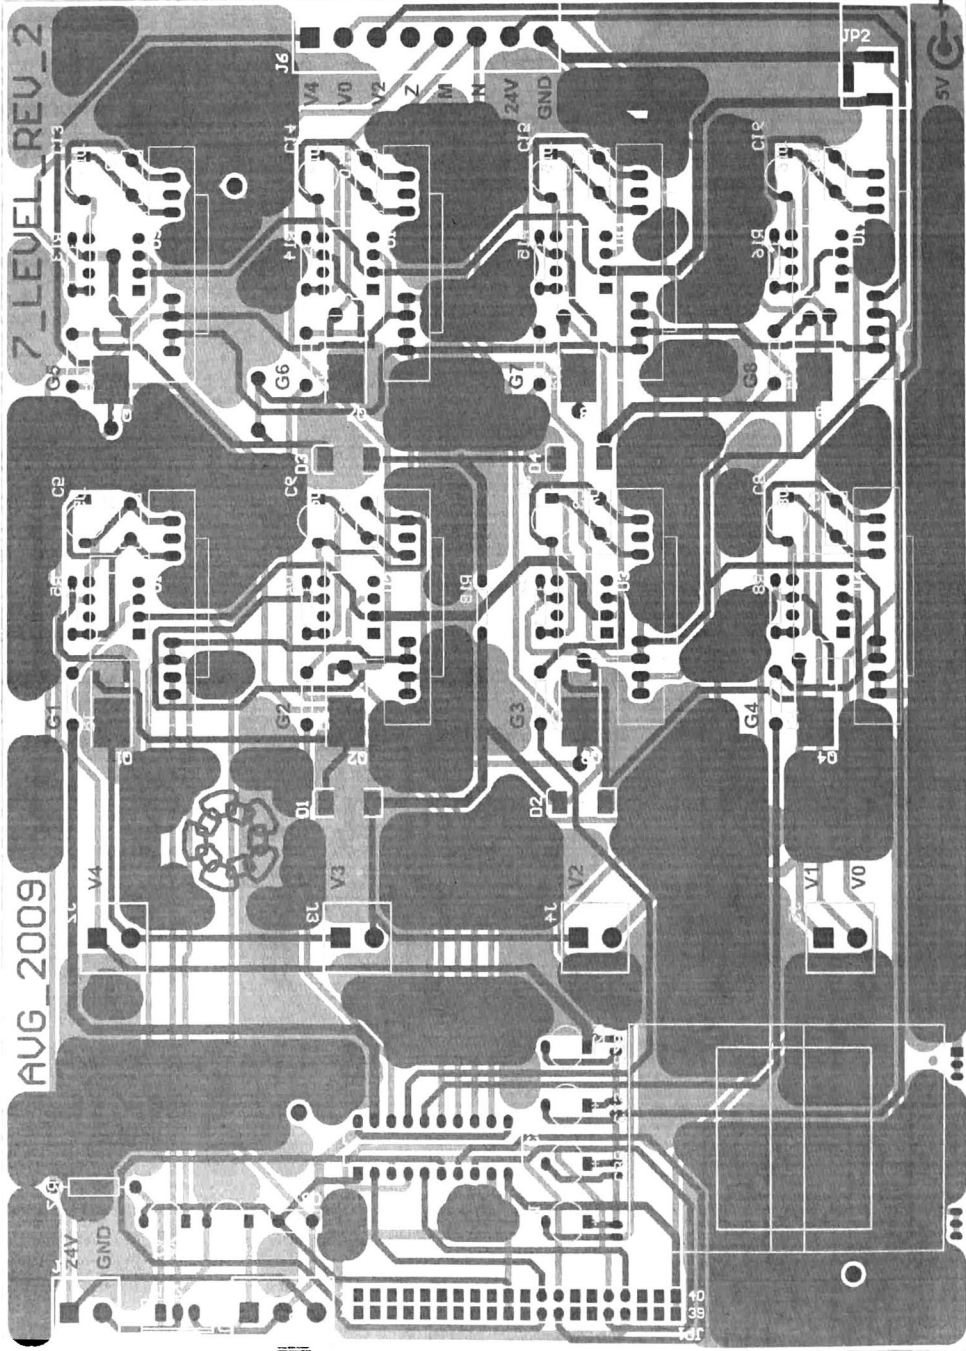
level Printed Circuit Board view from Bottom Side.
